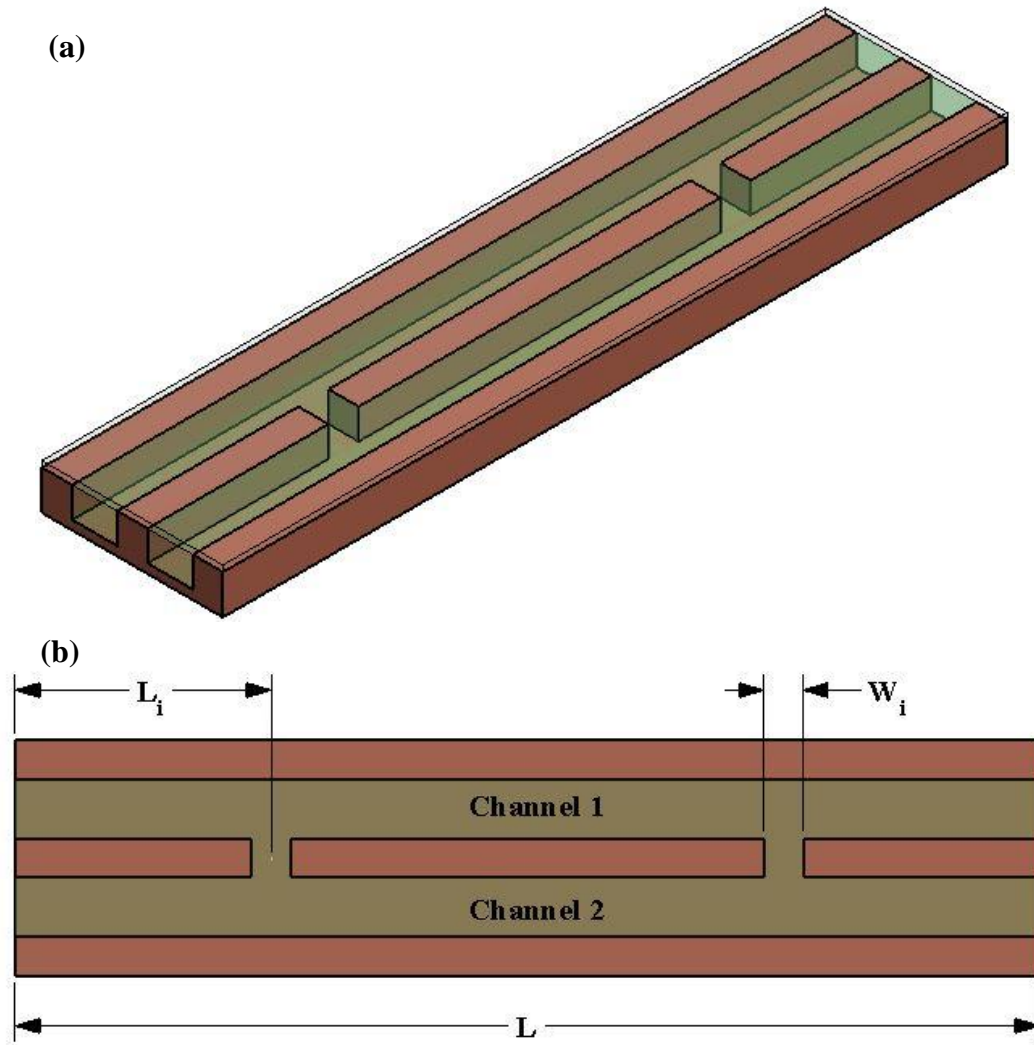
Schematic of the inter-connected mini-channel heat sink (a) isometric view (b) front view.
